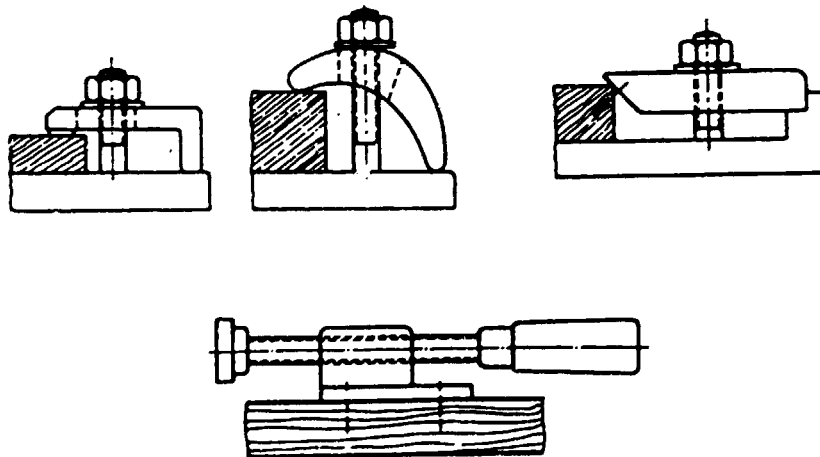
Screw clamps for holding workpieces on routing jigs.
